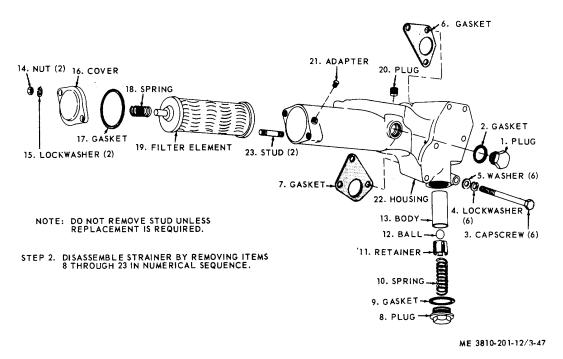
Engine oil strainer (for engine Model 687C-18-ES), removal, disassembly, reassembly and installation.
